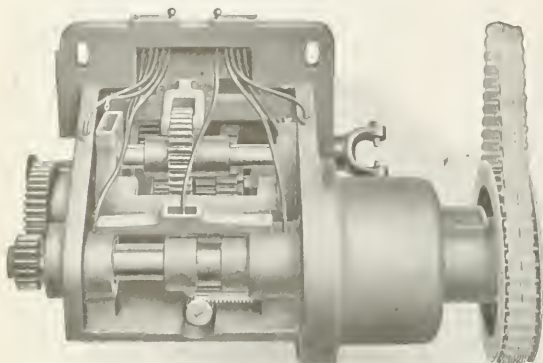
Form of Clutch employed to insure having Hob always catch the Right Tooth
